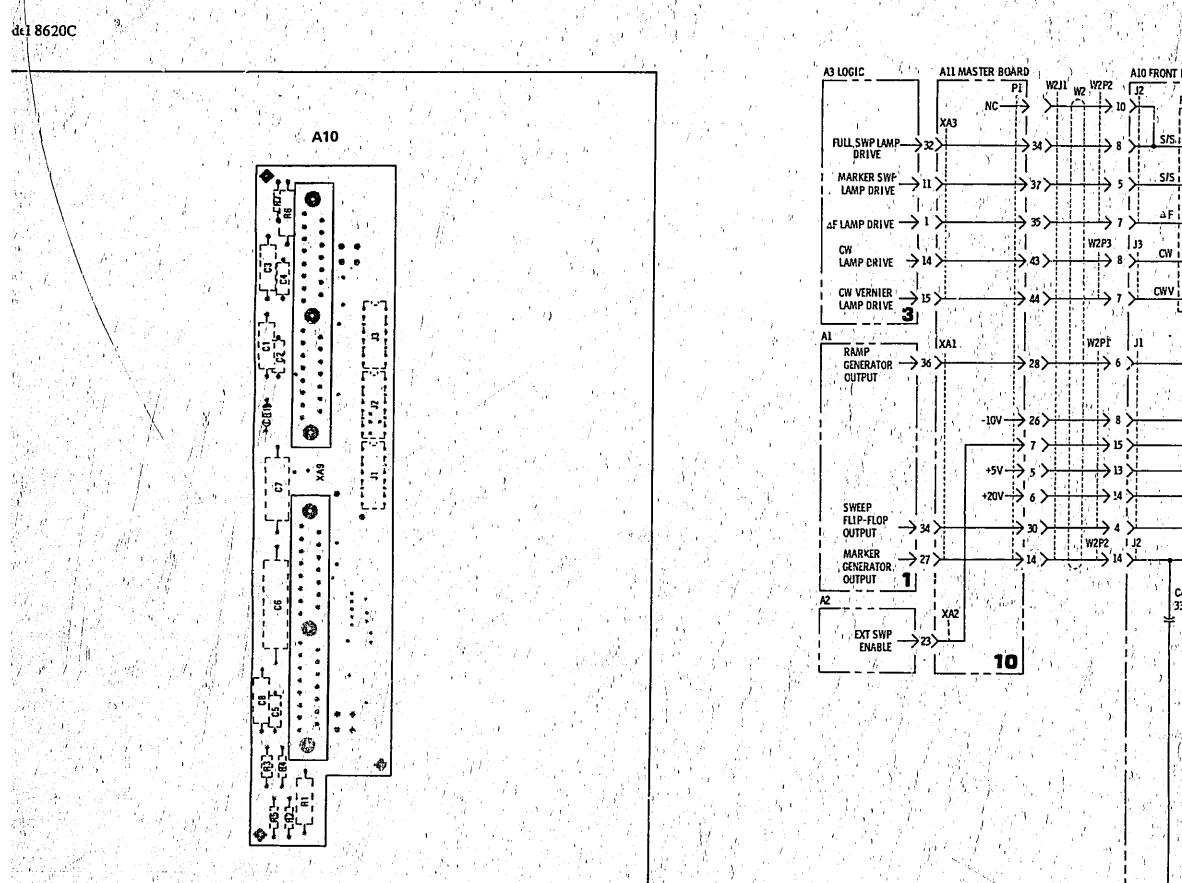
A10 Front Interconnect Assembly, Component Locations
